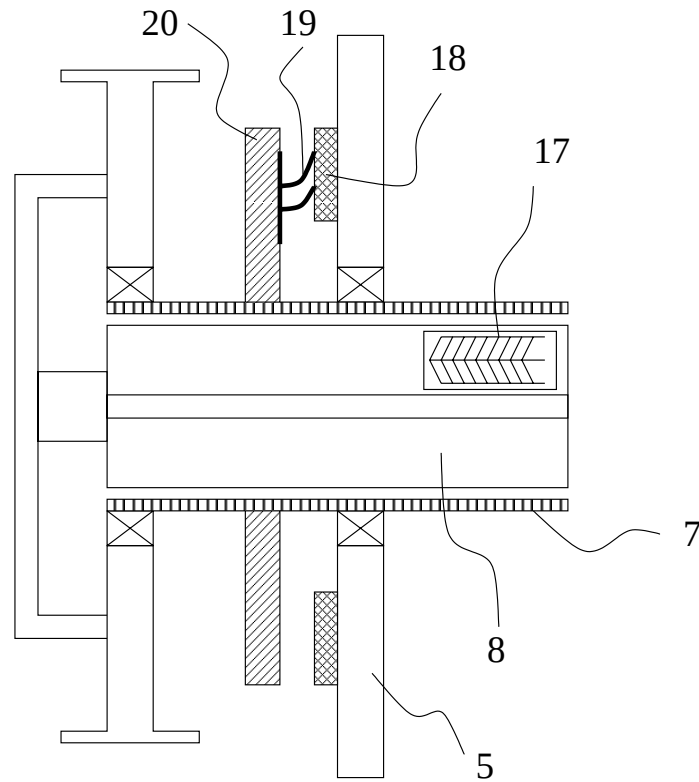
In addition to the encoders on the backs of all the motors, each joint has a strain gauge (17) mounted on the spring (8) which measures the torque at the joint, as well as a potentiometer. The potentiometer is of a hollow shaft construction, with the resistive element (18) forming a ring mounted on the support (5). A plastic ring (20) clamped to the tube (7) holds a wiper (19), which completes the potentiometer. The measurement is of the angle between the tube and supports, so measuring the angle of the joints.
